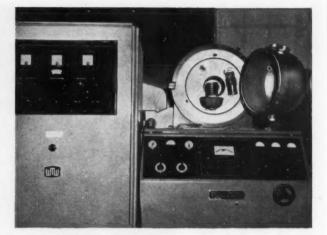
Vacuum Induction Melting Furnace for Laboratory Use
